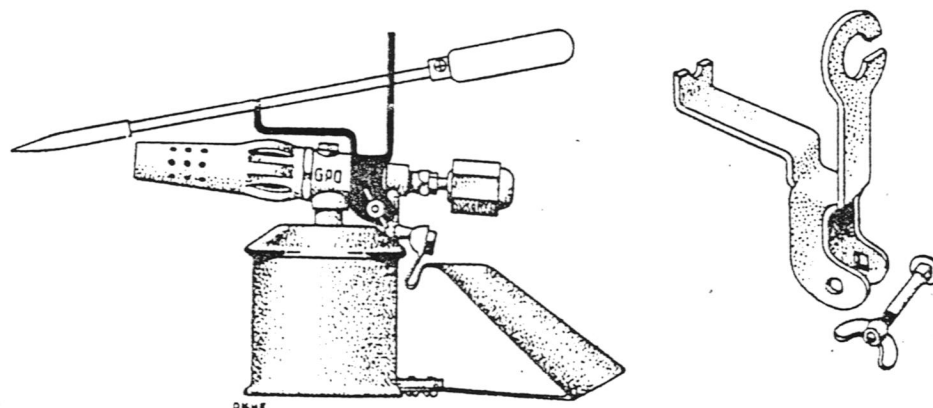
SUPPORT FOR SOLDERING IRONS
